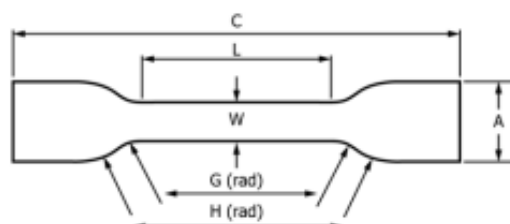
Tensile Dumbbell Specimen Dimension Key
